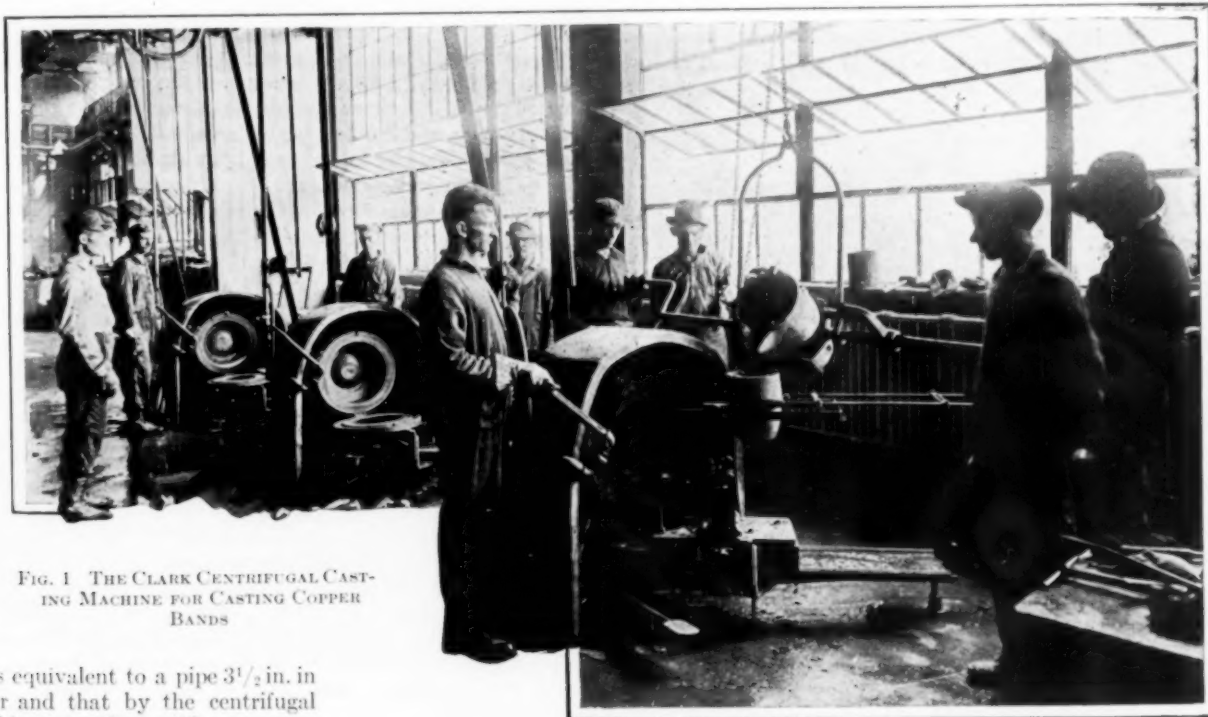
THE CLARK CENTRIFUGAL CASTING MACHINE FOR CASTING COPPER BANDS
